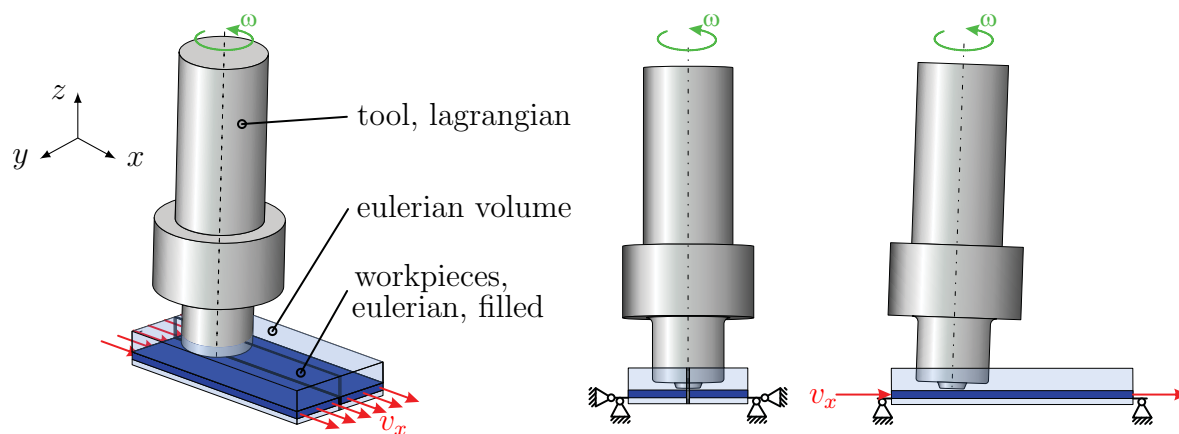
Schematic model assembly. isometrical, front and side view. Illustrated without fixture, anvil and tool shank
